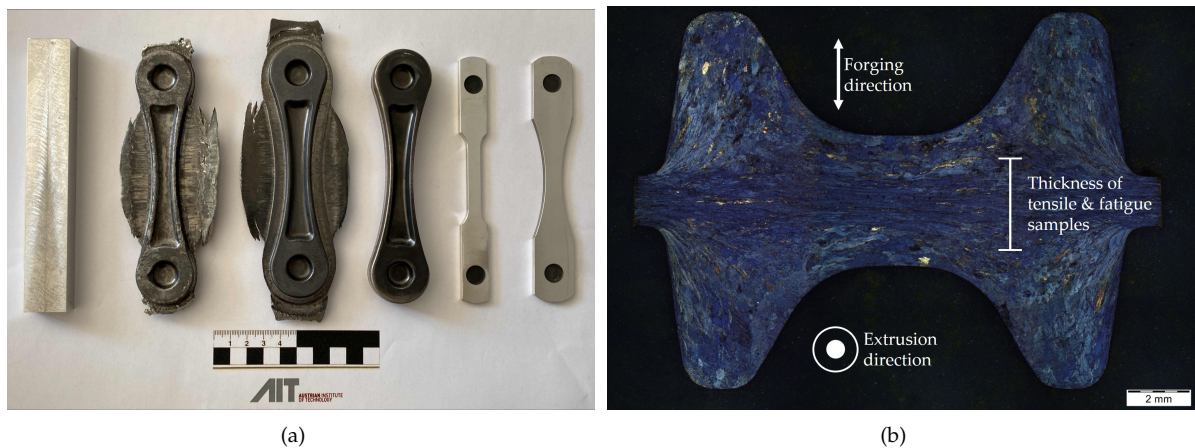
(a) Showing (from left to right) forging stock, pre-forged piston rod, part after final forging, deburred piston rod as well as samples for tensile testing and fatigue measurements, (b) OM image of a piston rod cross-section.
